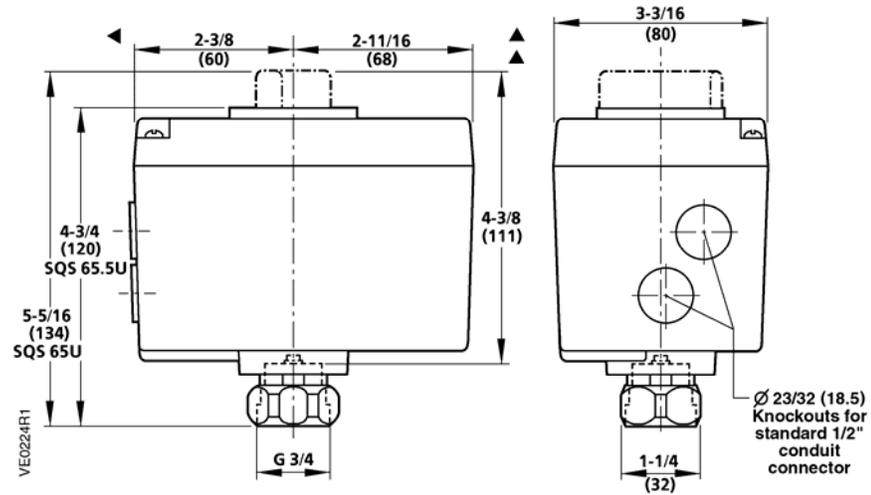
Dimensions of the SQS65U Series Actuator, Shown in Inches (Millimeters).
